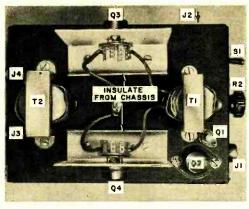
Overall view of top of chassis, showing location of principal parts and associated wiring.
